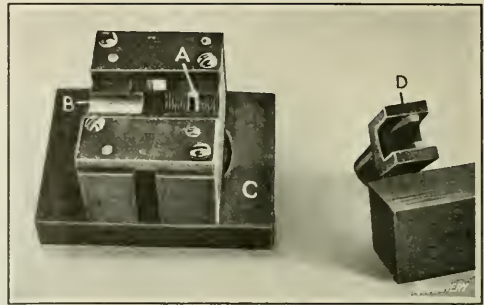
Punch and Work-holding Block for machining Flats on Part shown in Fig. 1
